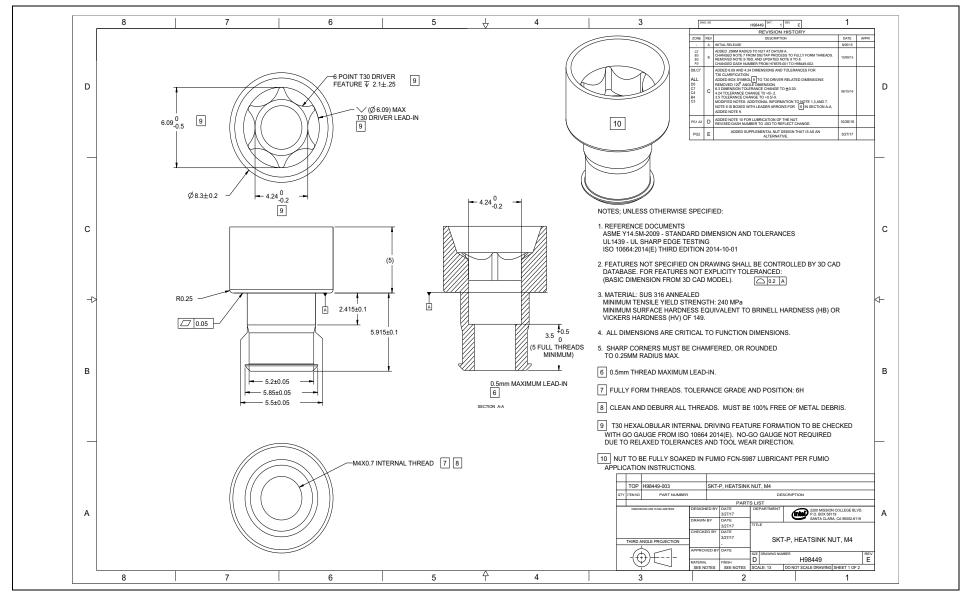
Heatsink Nut (Sheet 2 of 2)
